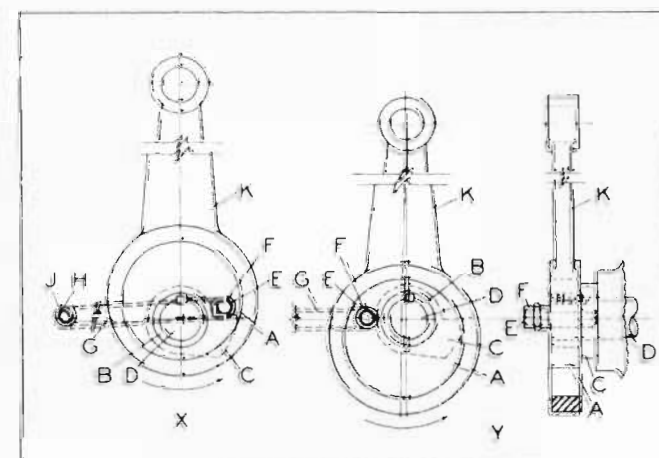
Modified eccentric provides rapid return of machine-slide followed by a dwell period.
